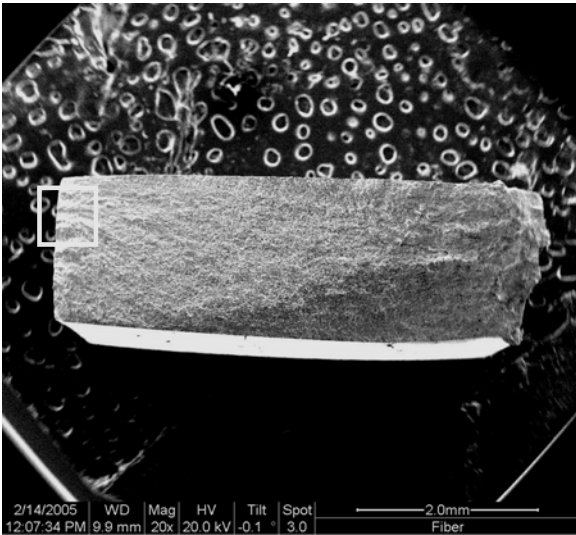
Specimen F/G-05, overall view of fracture surface
